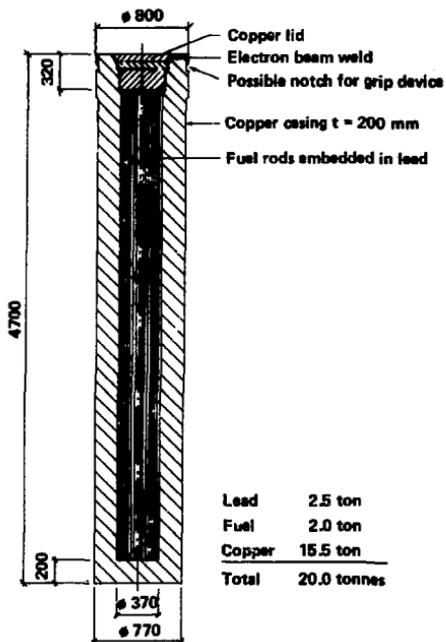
Longitudinal section of copper canister with fuel rods embedded in lead (dimensions in mm).
